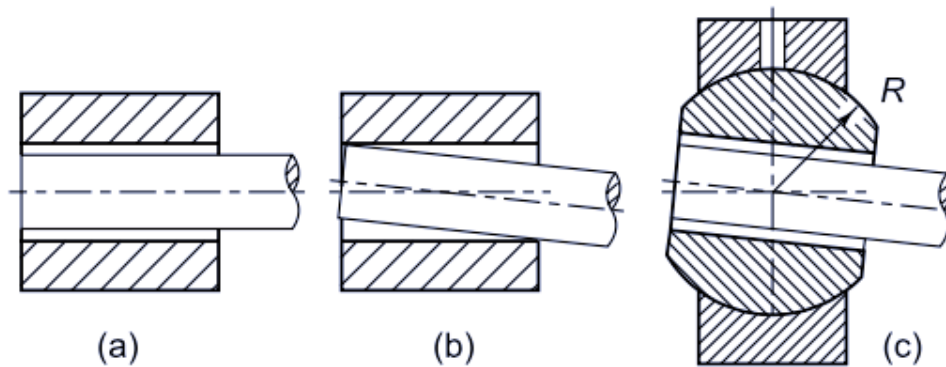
Self-aligning Bearing: (a) Shaft aligned with Bearing (b) Shaft misaligned with Bearing (c) Self-aligning Bearing
